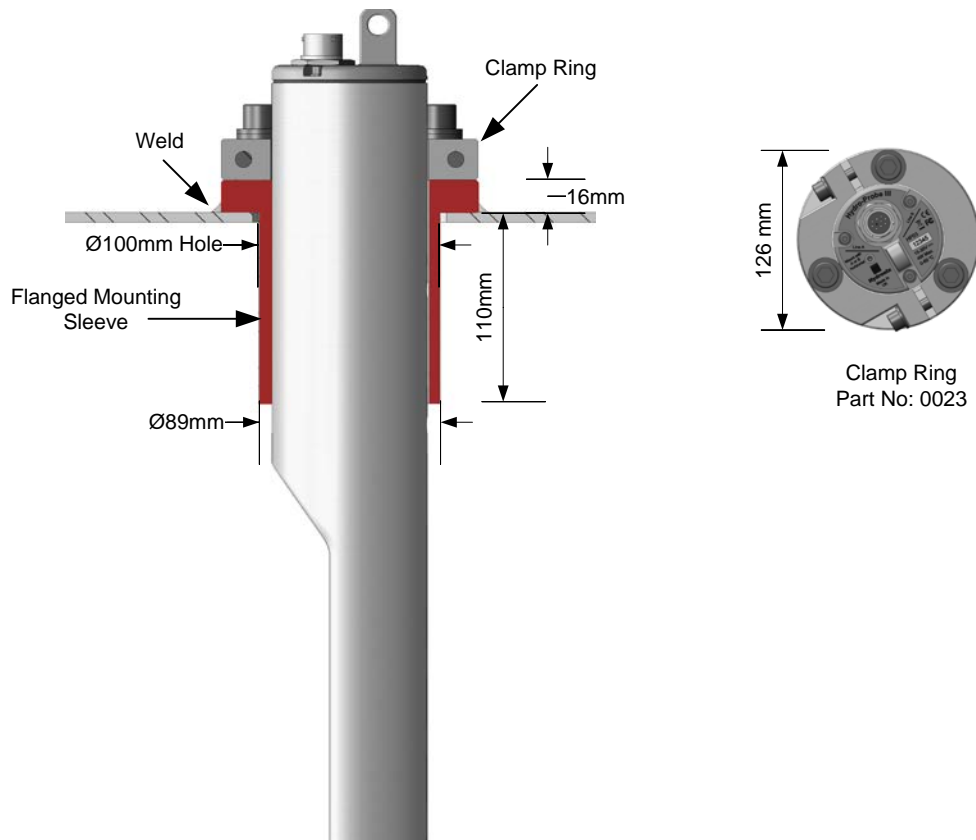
Flanged Mounting Sleeve (Part number 0024A)
